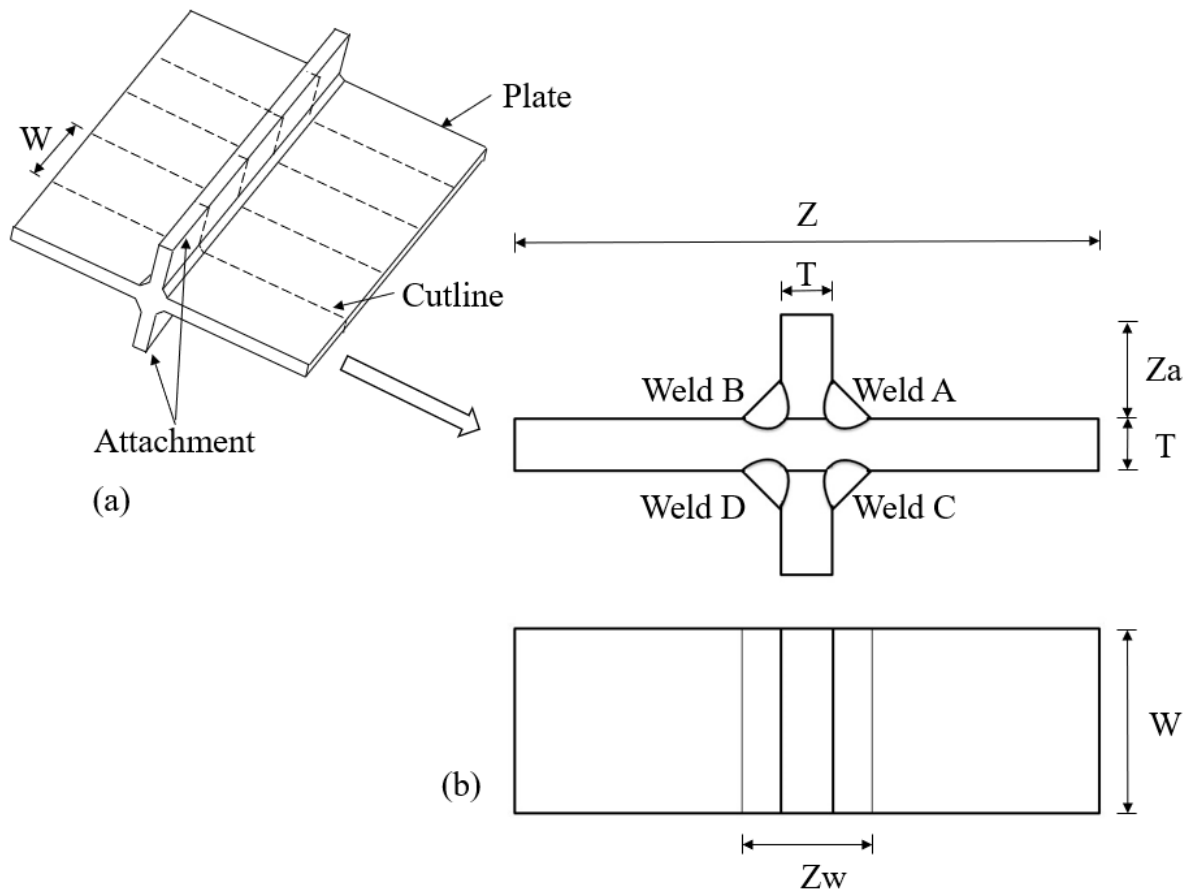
Fatigue test specimens: (a) the fabrication process and (b) sketch of the welded specimen (not to scale).
